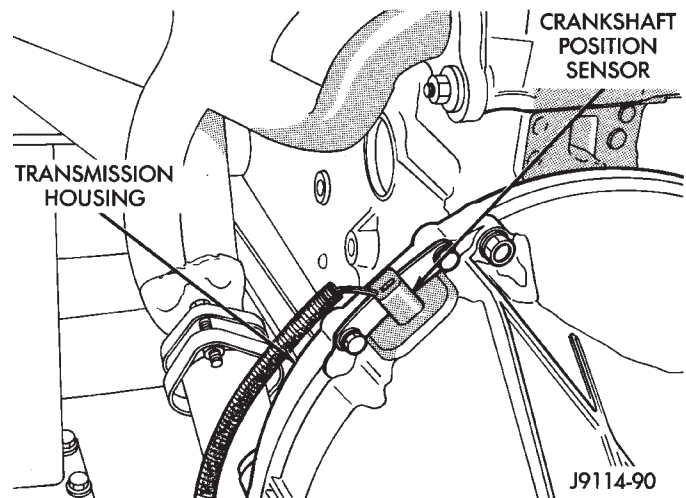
Crankshaft Position Sensor—4.0L Engine With Manual Transmission
